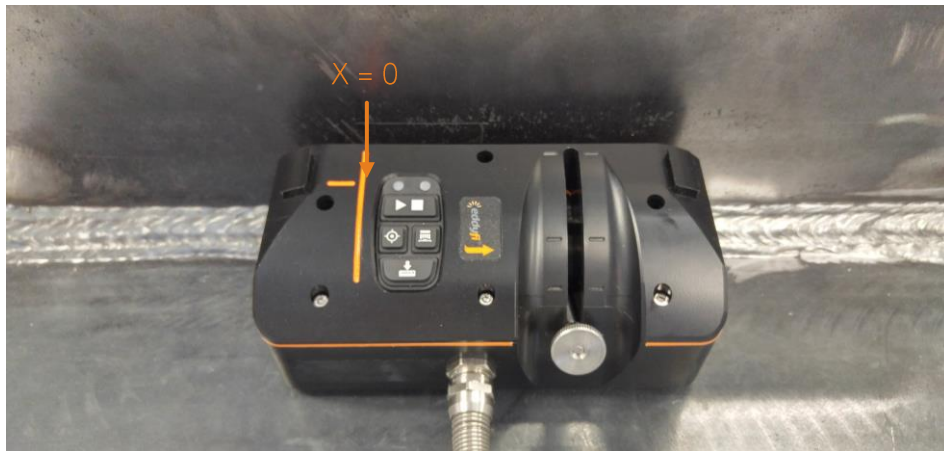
Scan position  $X=0$  aligned with the marker line on the fillet weld probe
